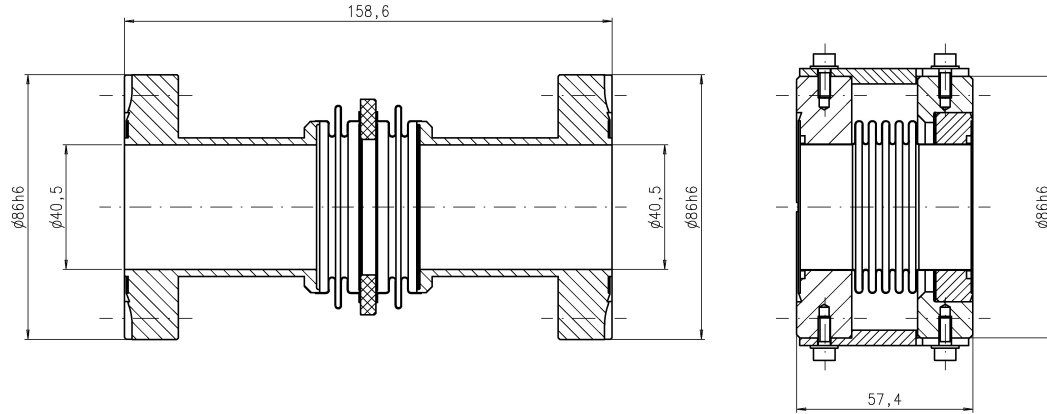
2D drawing of the toroid chamber and the bellow unit. This picture shows the unshielded version for the low energy part of the machine, where particle cleanliness is required.
